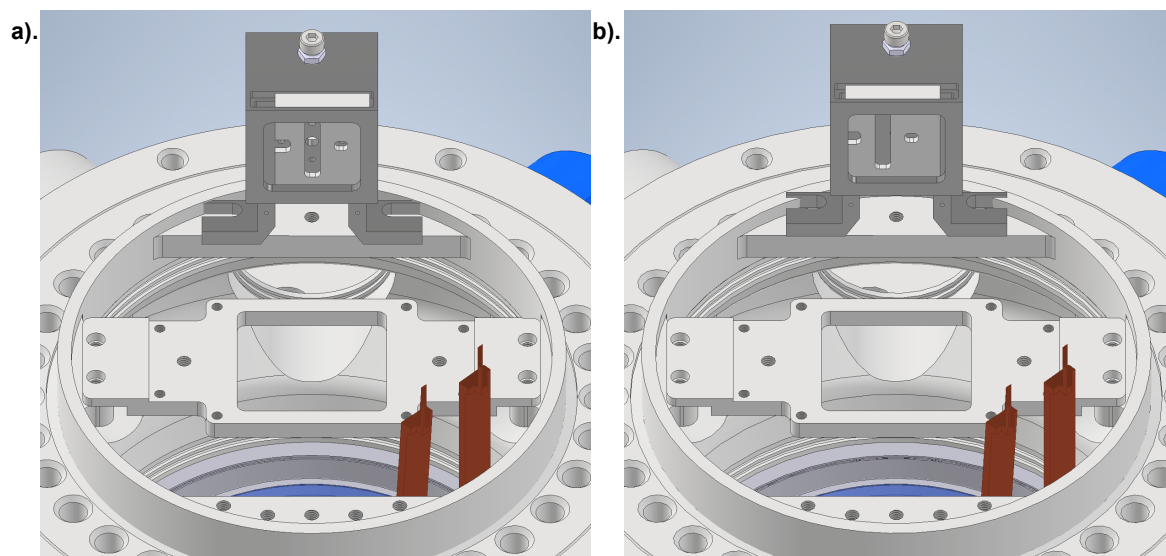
a Oven external holder, machined in aluminium and mounted on the support ring. The macor oven from Figure 3.10 is mounted inside. The sliding door piece blocks the ovens, b Same diagram showing the sliding door in the blocked position, preventing the oven flux from coating the trap during the bakeout procedure.
